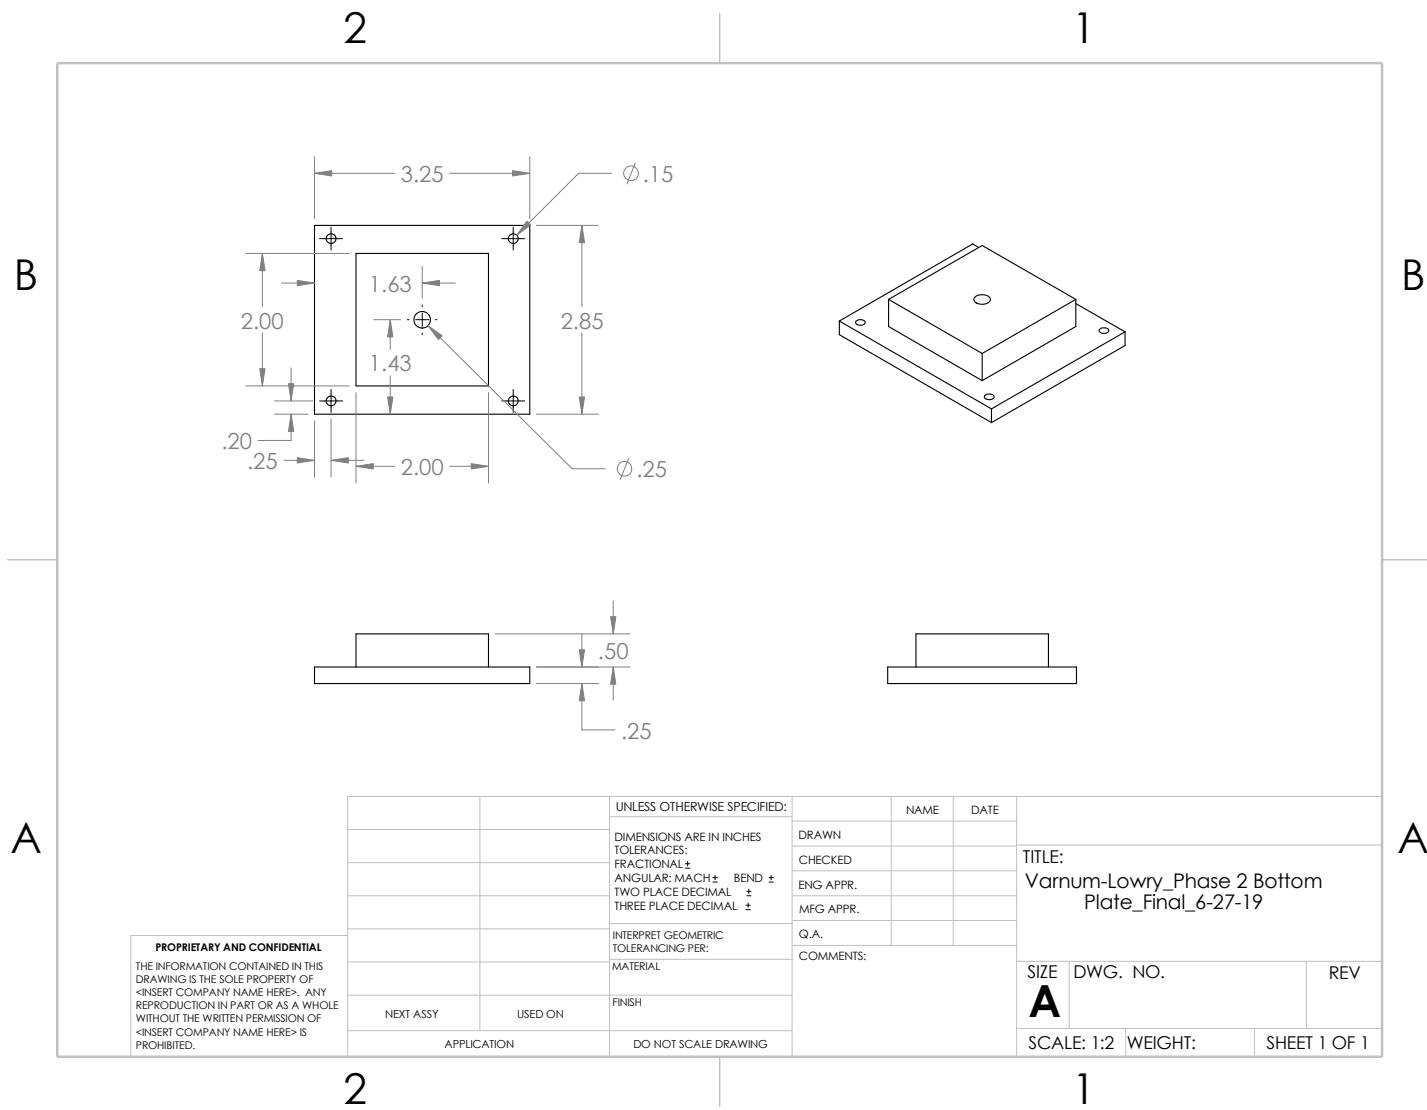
Engineering drawing of the fluid chamber's interface plate, which connected to the gas injection system on one side and the orifice plate on the other.
